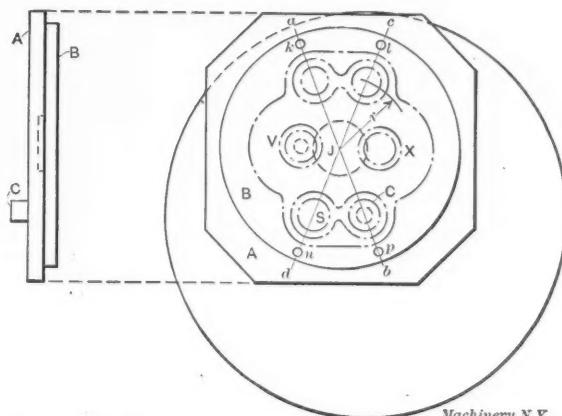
Diagram of Fixture for Holding Double-cylinder Casting.
